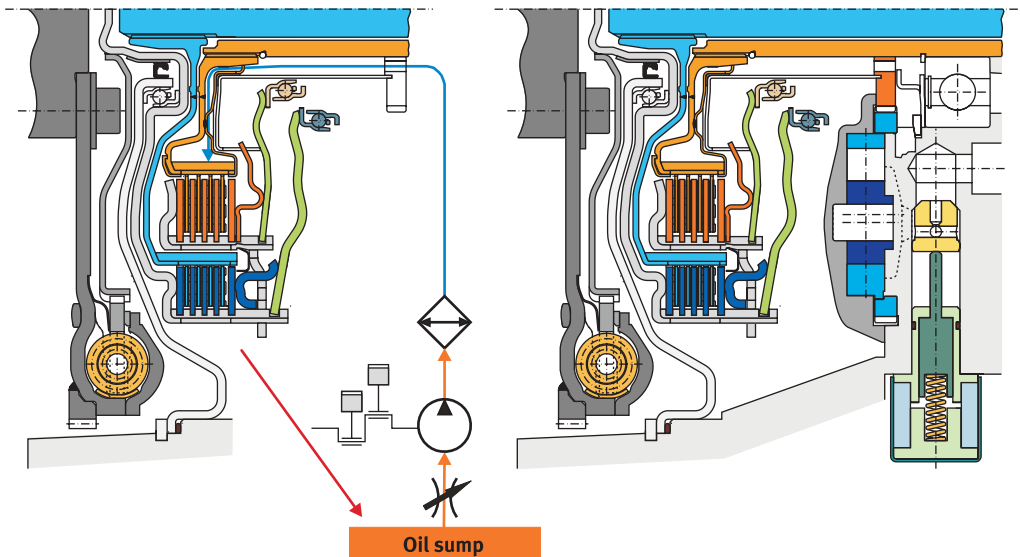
Cooling concept for an electro-mechanically or electro-hydraulically actuated wet double clutch
